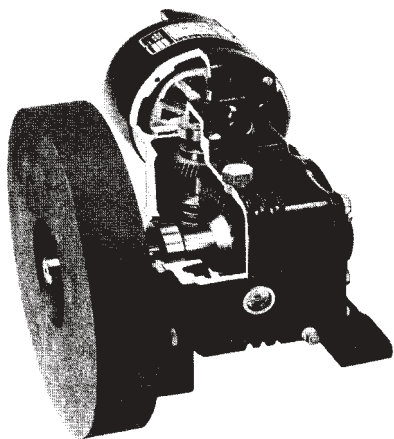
Right angle worm gearmotor (two stages of worm gearing with inertial load on output shaft).
